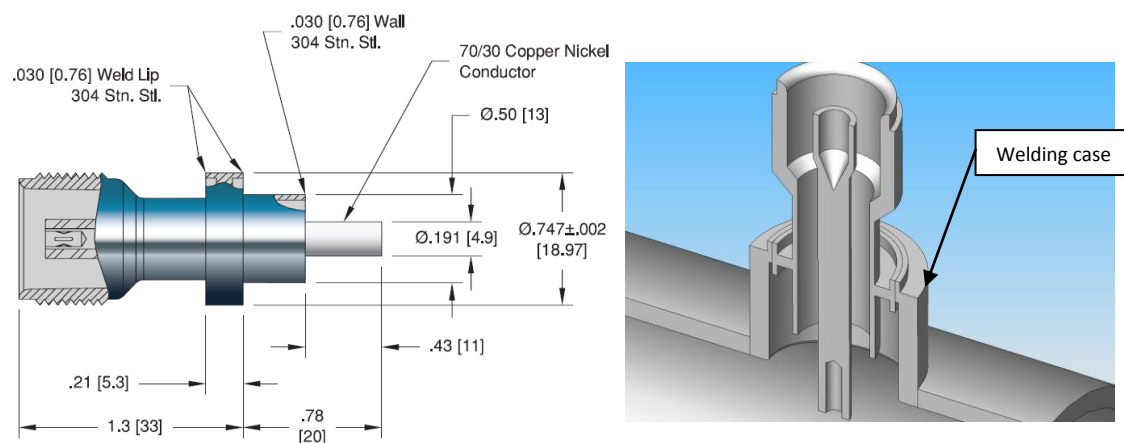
HN Ceramaseal [2] feedthrough for welding installation (left) and cut 3D model of a feedthrough assembled in a tube using a welding case (right)
